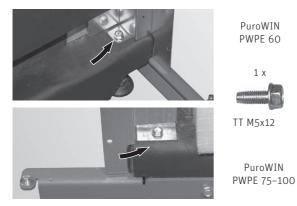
Securing the cladding bracket at the bottom with a TT screw
